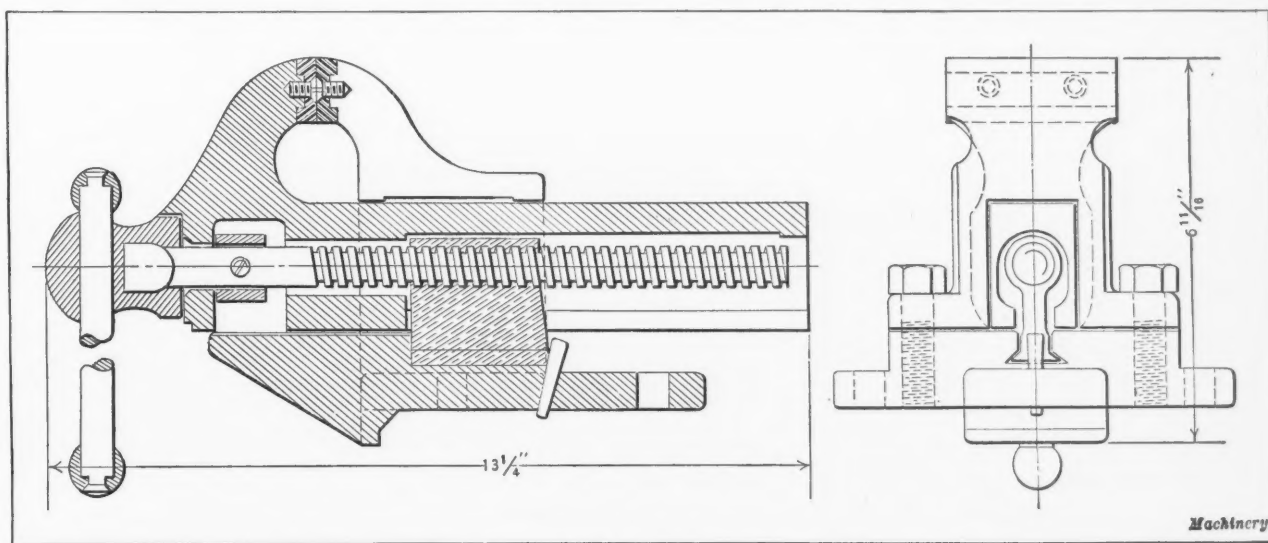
Construction of Bench Vise designed in the Drawing-room and built in the Machine Shop
